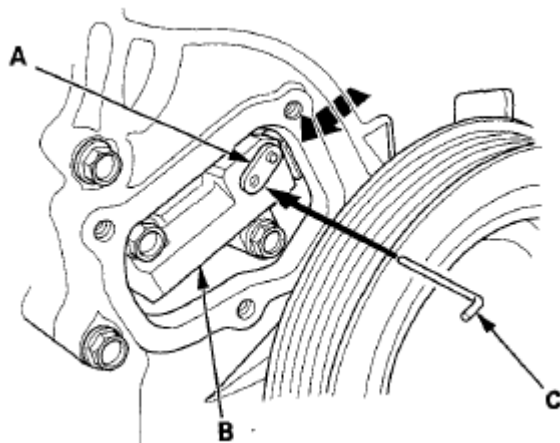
Identifying Lock, Auto Tensioner And Diameter Pin
